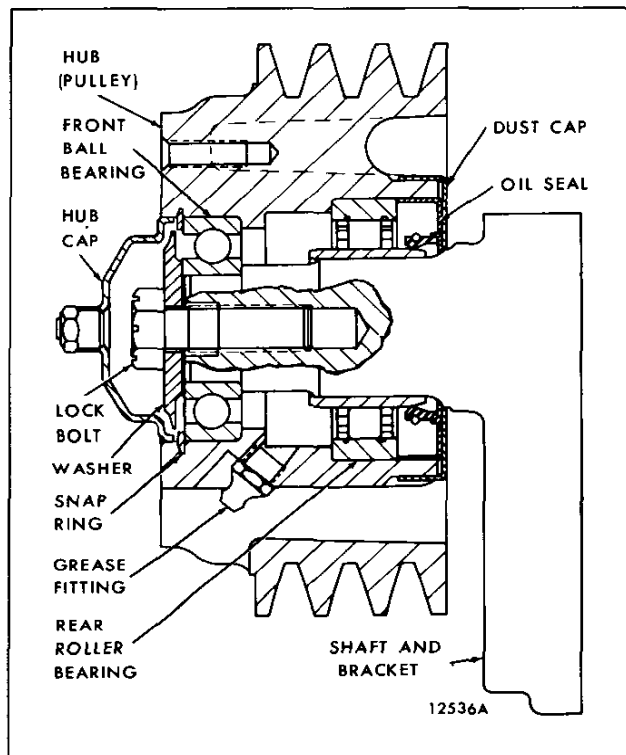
Shaft Type Fan Hub Assembly (4-53 and 6V-53 Engines)
